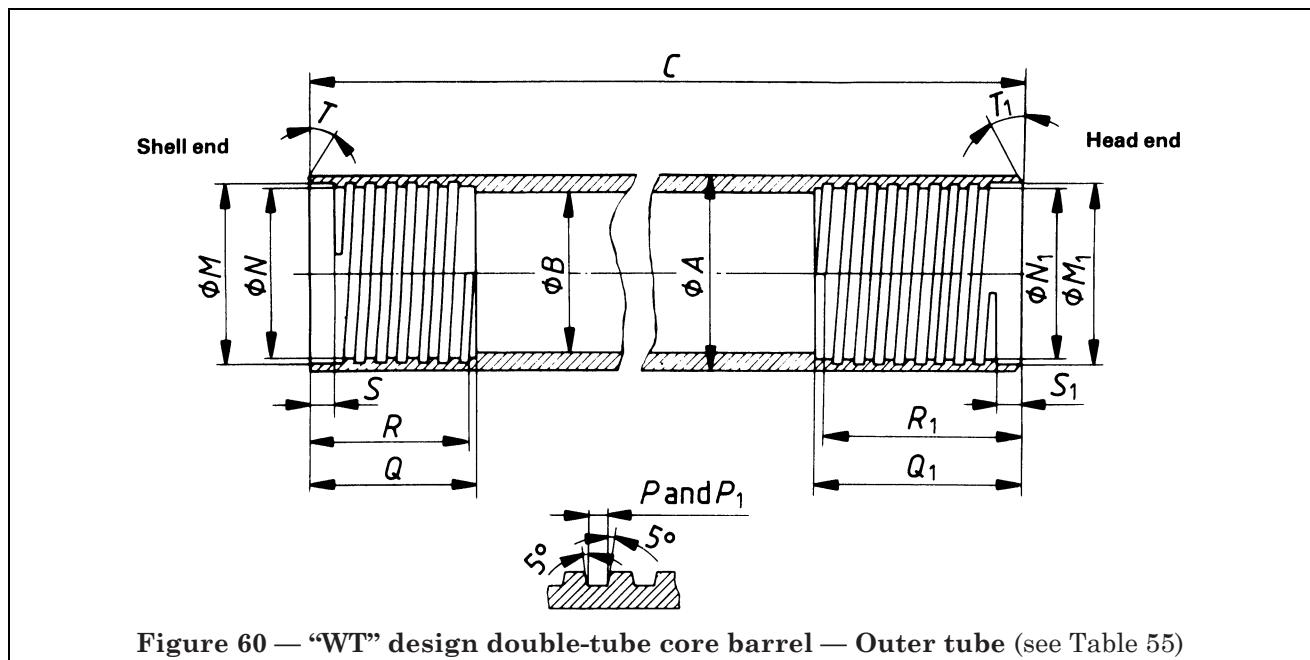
“WT” design double-tube core barrel — Outer tube (see Table 55)
